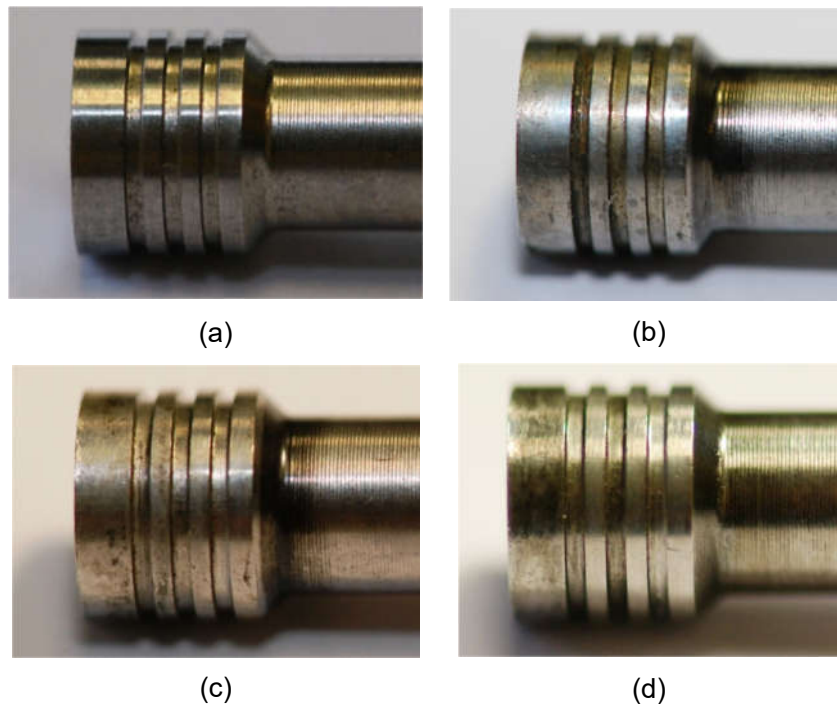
Visual aspect of the pin along welding cycles: (a) as-received pin condition (b) after 1350, (c) 2000 and (d) 2350 welds performed.
